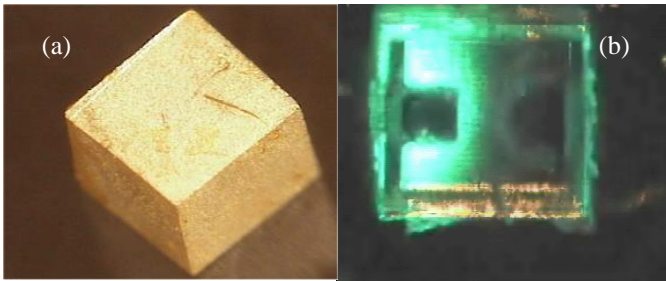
(a) Optical micrographs of the final gold plated 1mm cube module; (b) Flip-chipped LED turned on.
